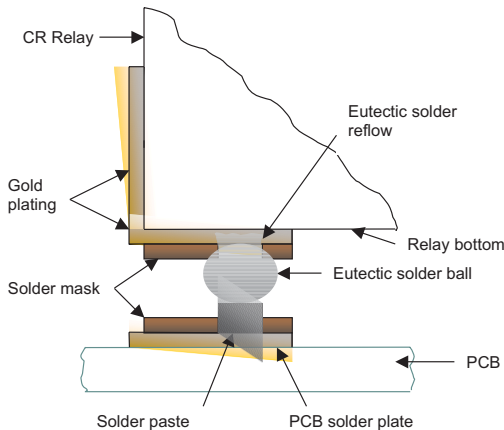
The CR Relay is shown placed on a PCB ready for solder reflow
